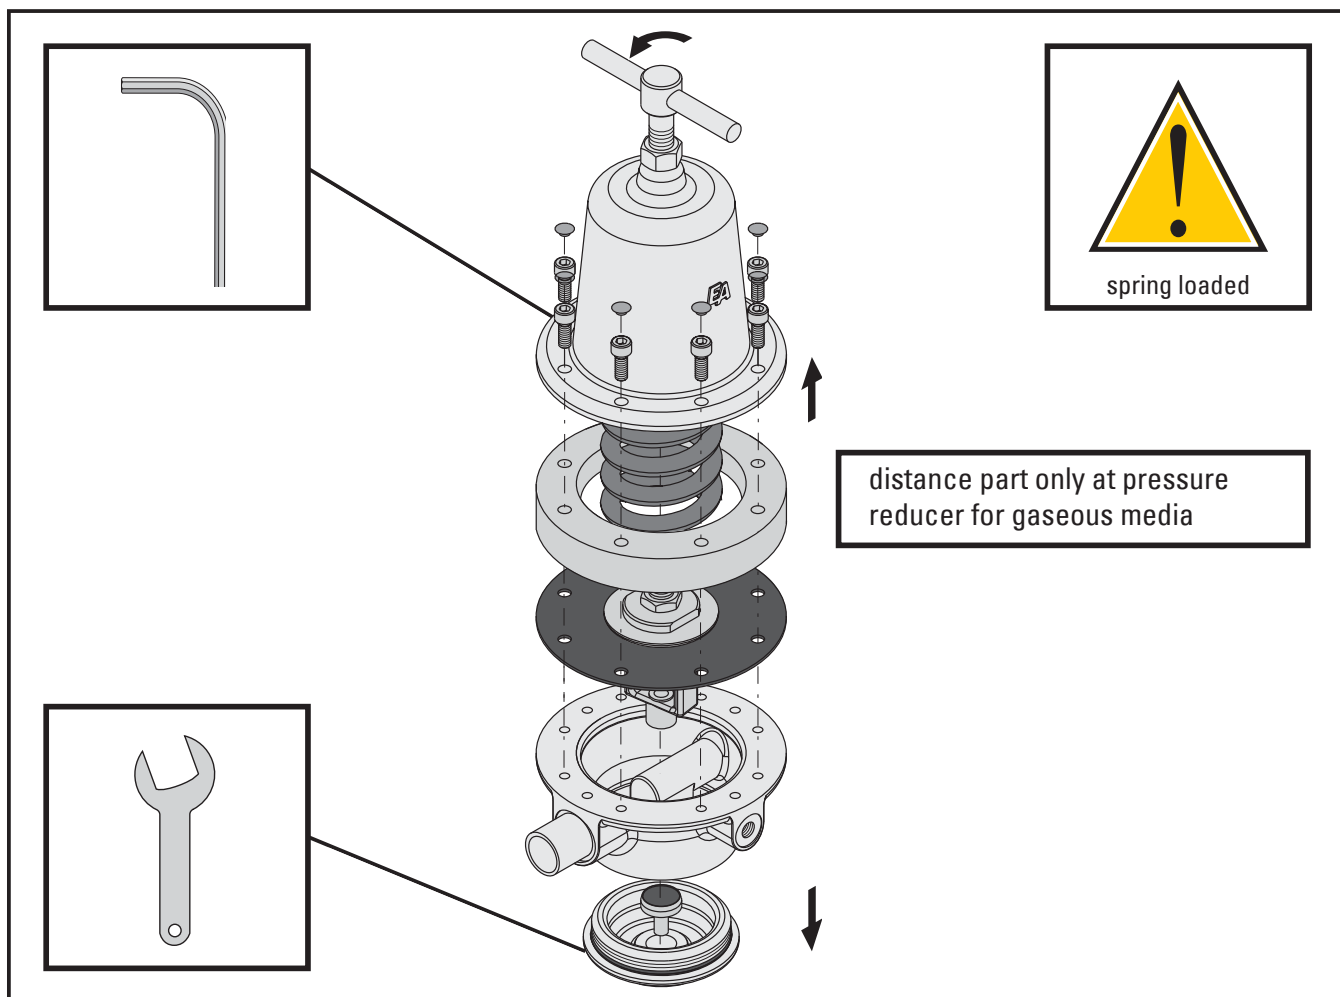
pressure reducer, mounting with welded connection, disassembling of a pressure reducer (Fig.: Art. DM330362).
